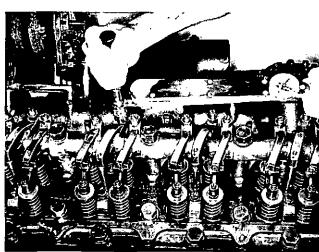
(V51489) Tightening injector adjusting screw locknut
